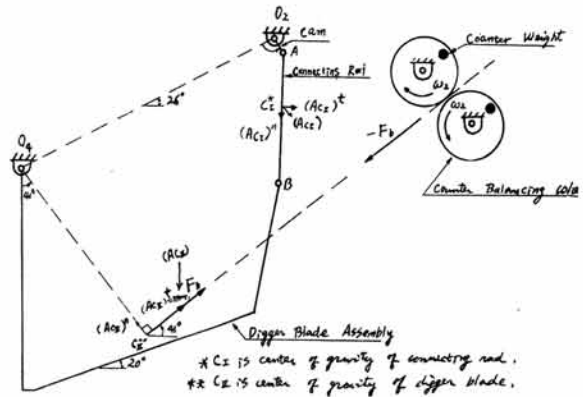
Acceleration vectors of the connecting rod and digger blade assembly.
